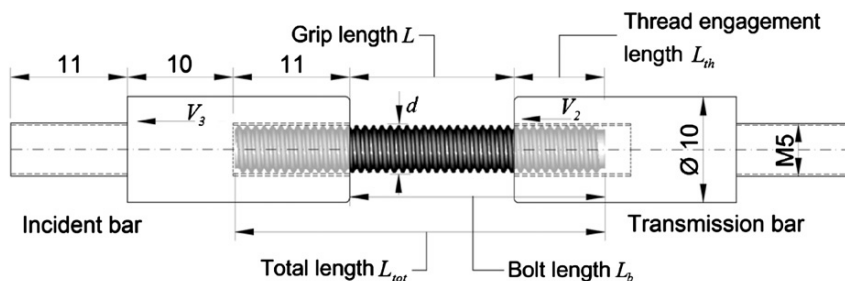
Geometry of the threaded rod with purpose-made fixtures[10]
